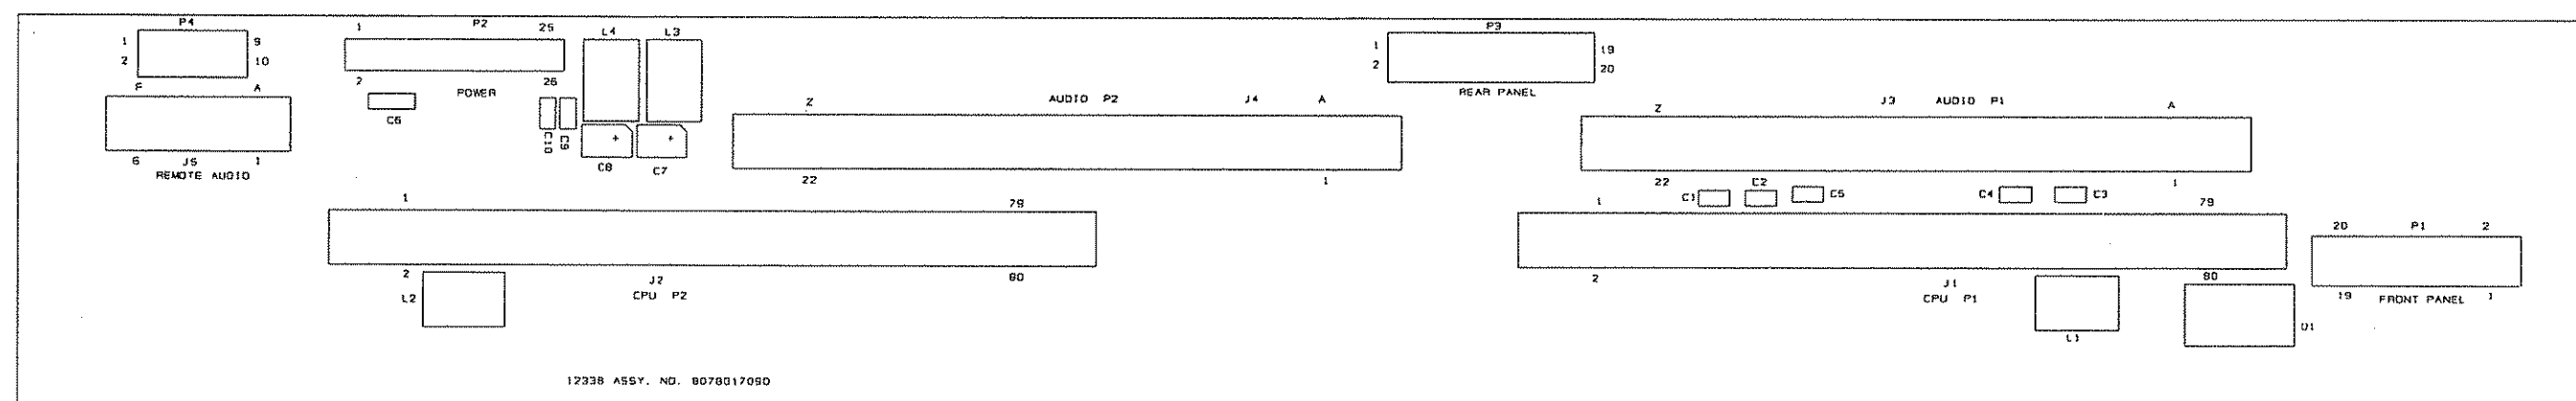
PC Assembly, Mother Board 3A2A5, page 2 of 4.
